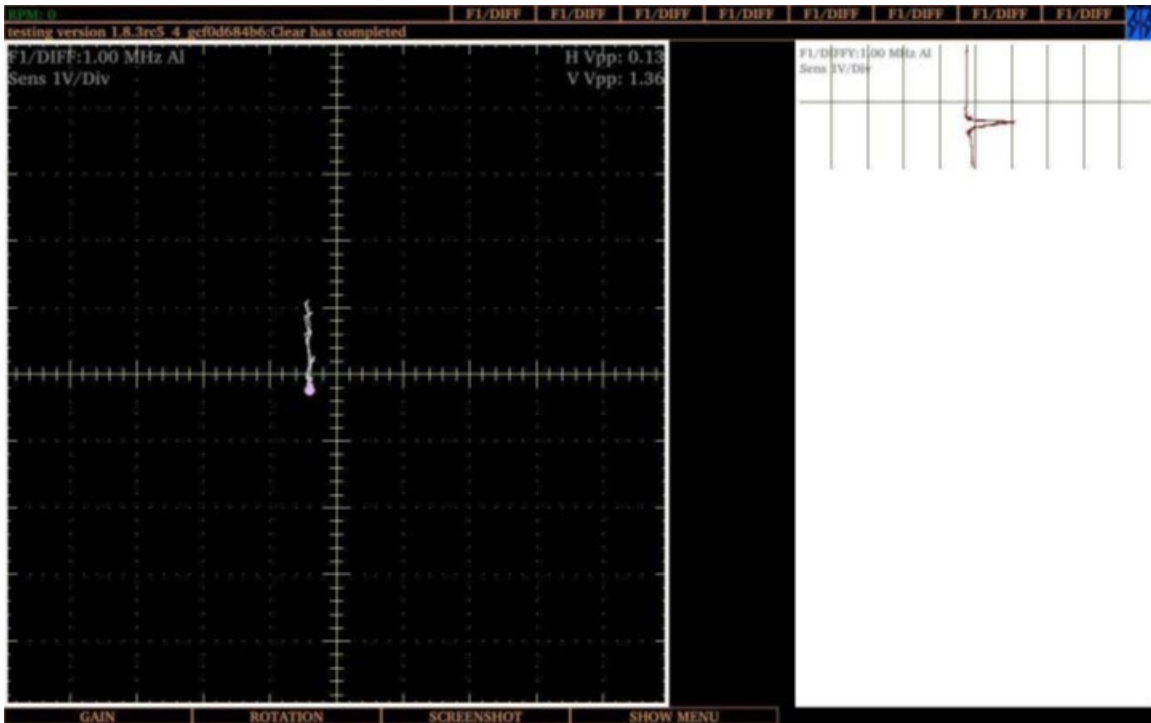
ET indication of defect at Location 2 in butt weld test panel MG-13
